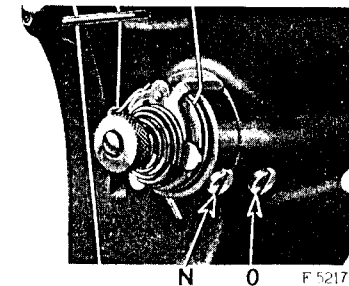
ADJUSTMENTS ON THREAD CONTROLLER
